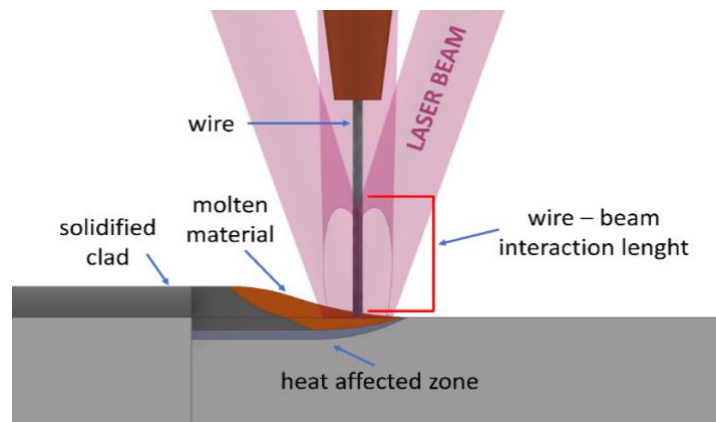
Laser cladding process with coaxial wire feeding scheme
